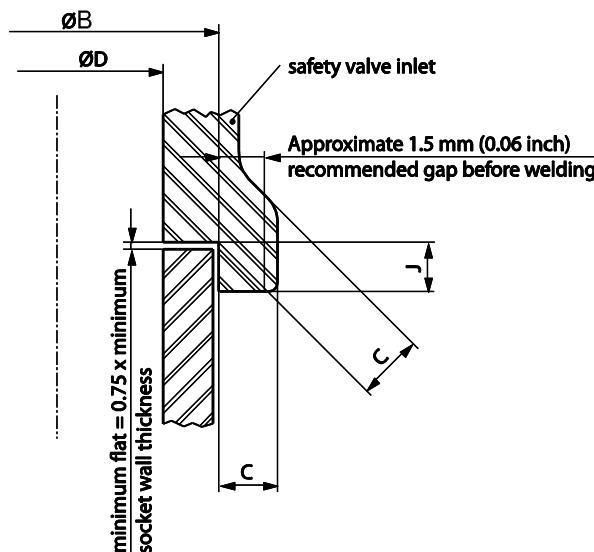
ASME B16.11 – welding gap and minimum flat dimensions for socket-welding fittings
